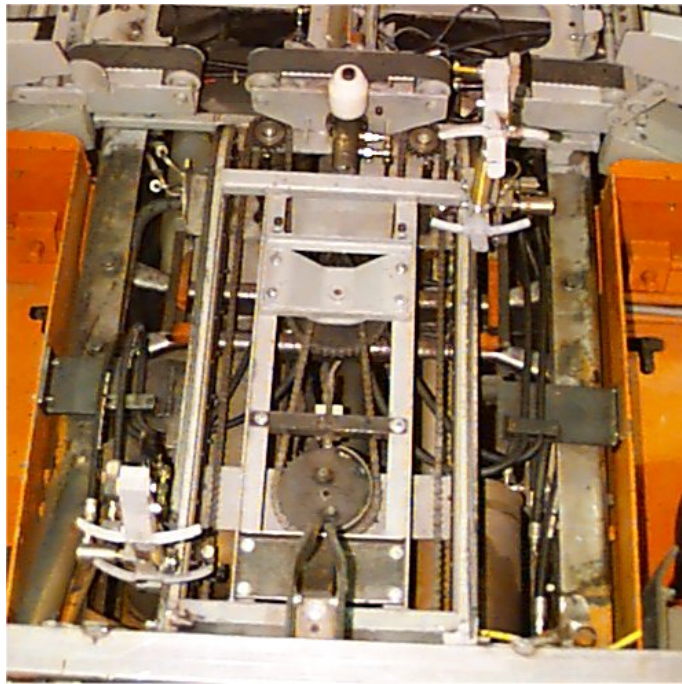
Gripper arm assembly at lateral conveyor belt
